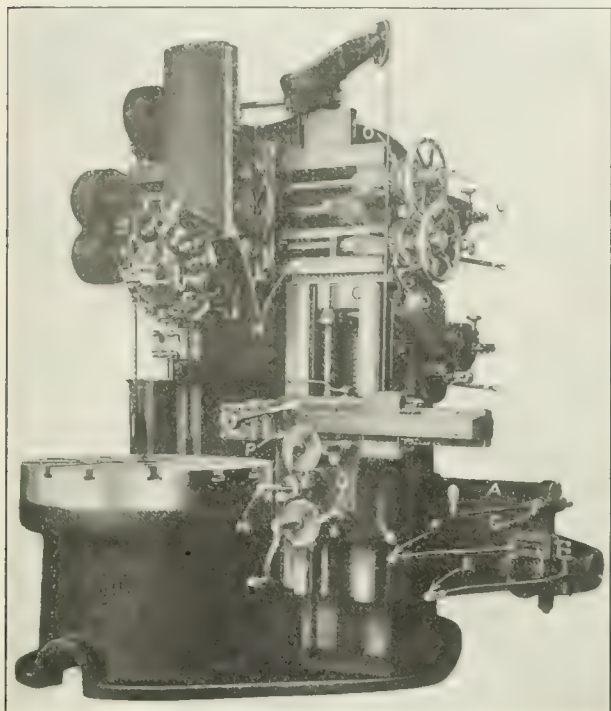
The Maxi-Mill Type of 42-In. Vertical Turret Lathe Built by the Bullard Machine Tool Company, Bridgeport, Conn.
